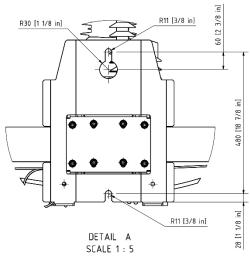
Rec35_Smart4_HDG Crossarm assembly drawing
